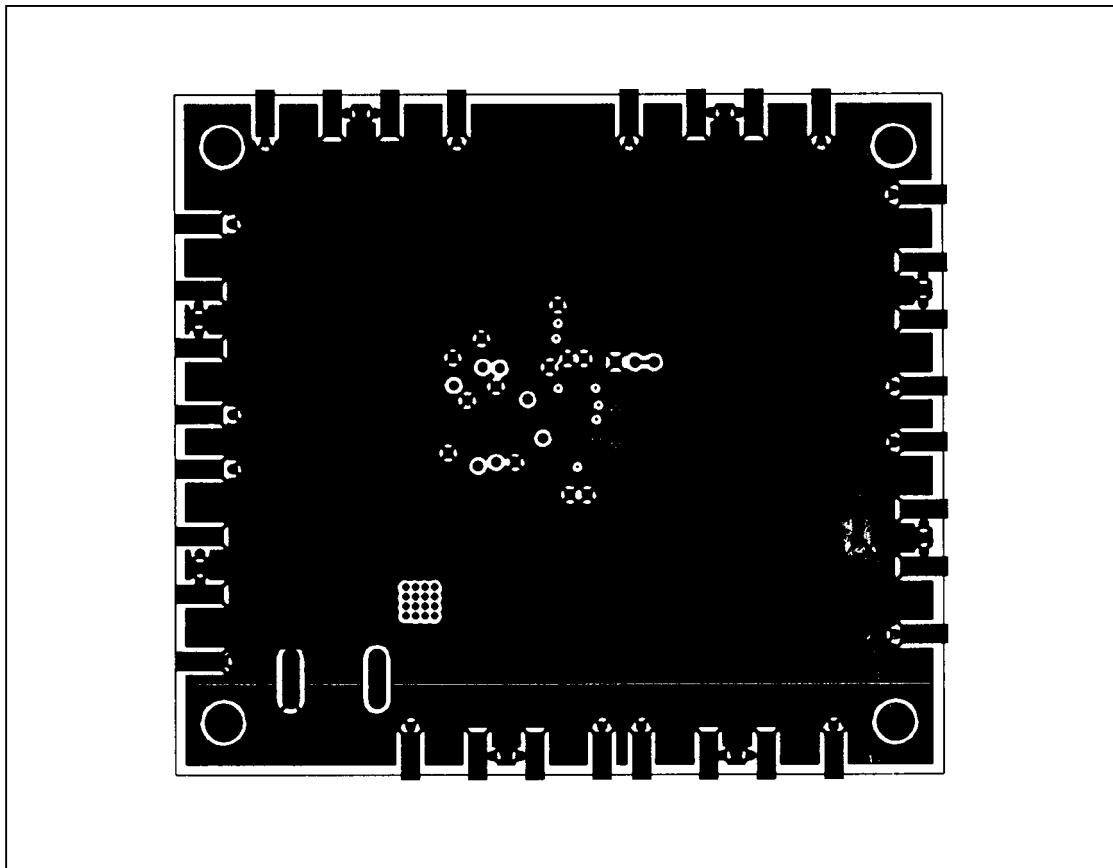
MAX3681 EV Kit PC Board Layout—Solder Side
